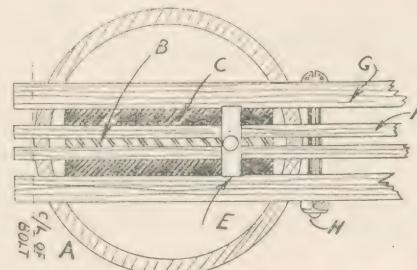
Enlarged sketch showing assembly of battery plates and method of clamping together
